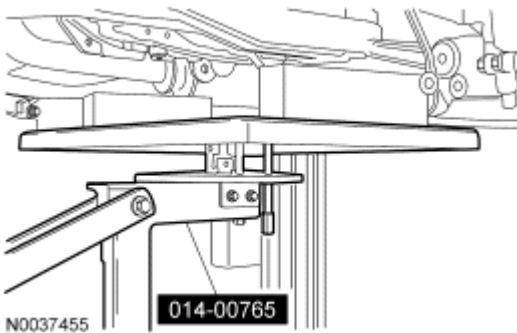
Positioning Special Tool (014-00765) Under Subframe Assembly
